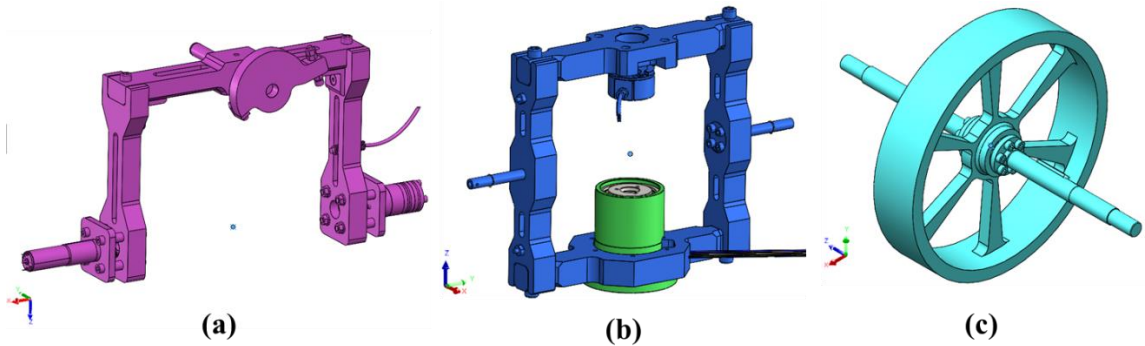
CAD of (a) Ship (b) Enclosure and (c) Flywheel
